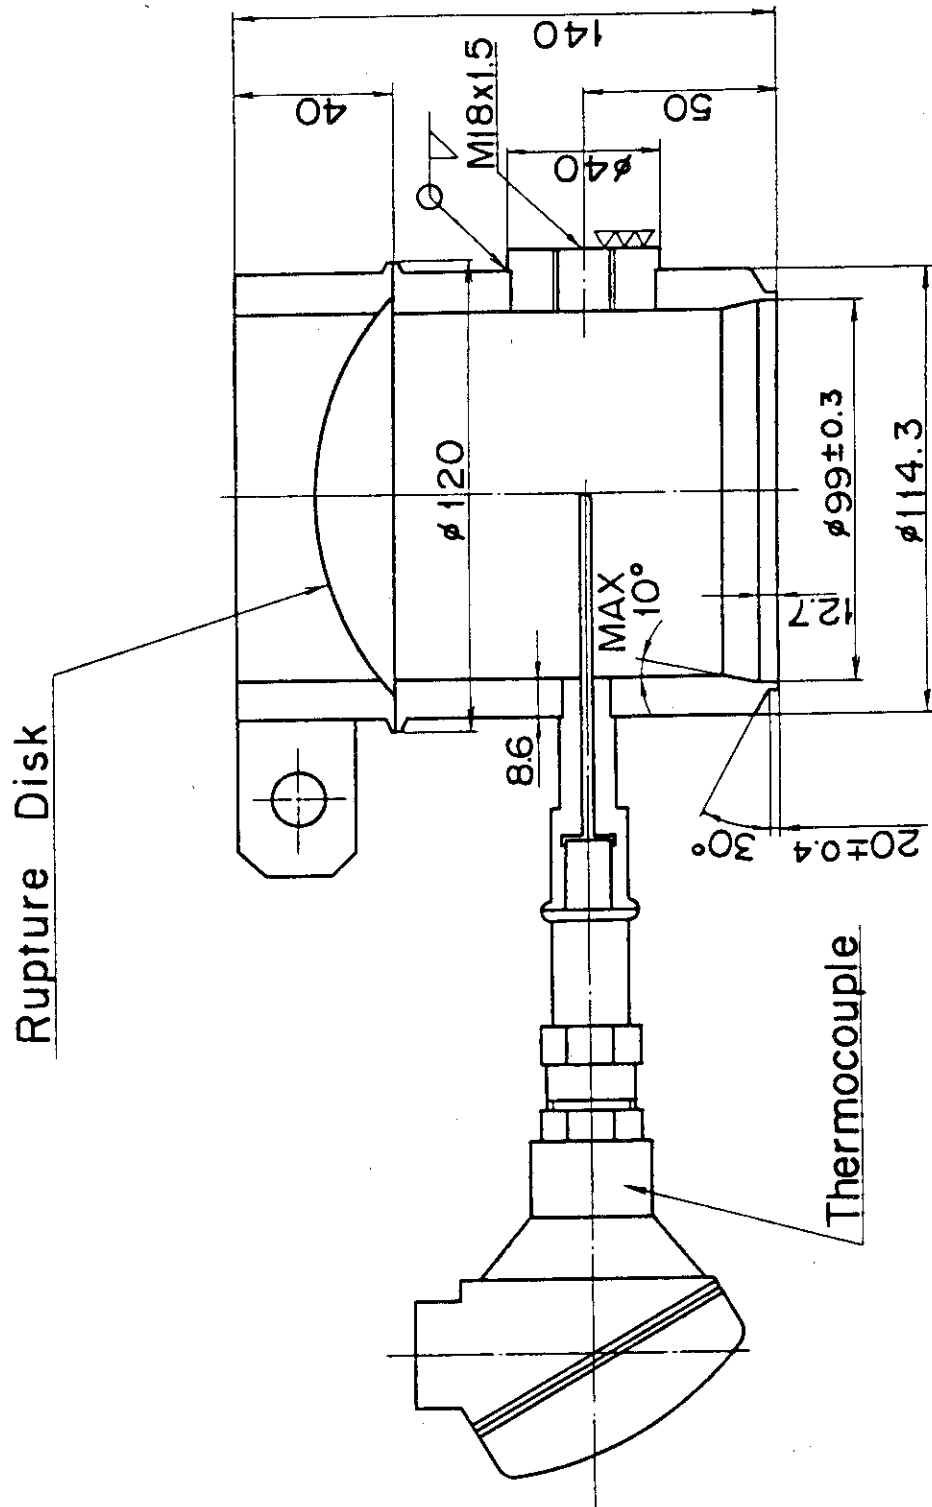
Details of Welded Type of Rupture Disk
